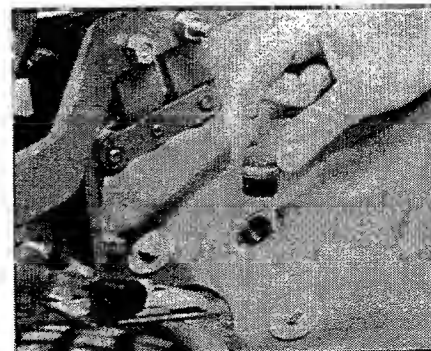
Remove dipstick to check gear oil in tine attachment transmission. Insert dipstick so markings face rear of tiller.
